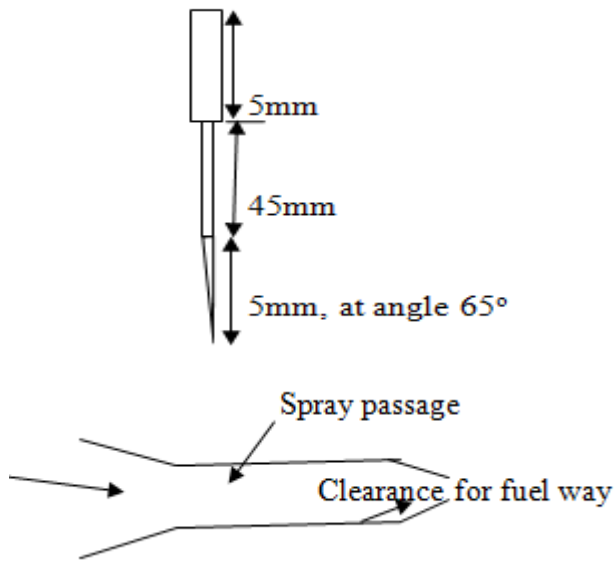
Pin valve and fuel way of the MAN DIESEL Nozzle
